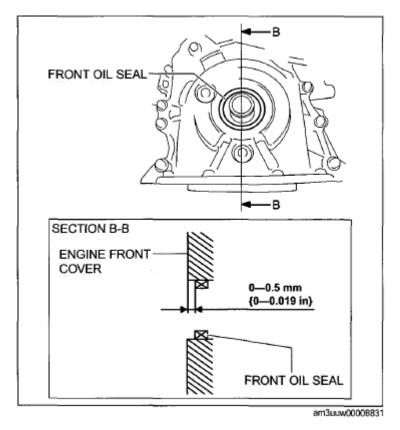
Identifying Front Oil Seal Press-In Dimension
